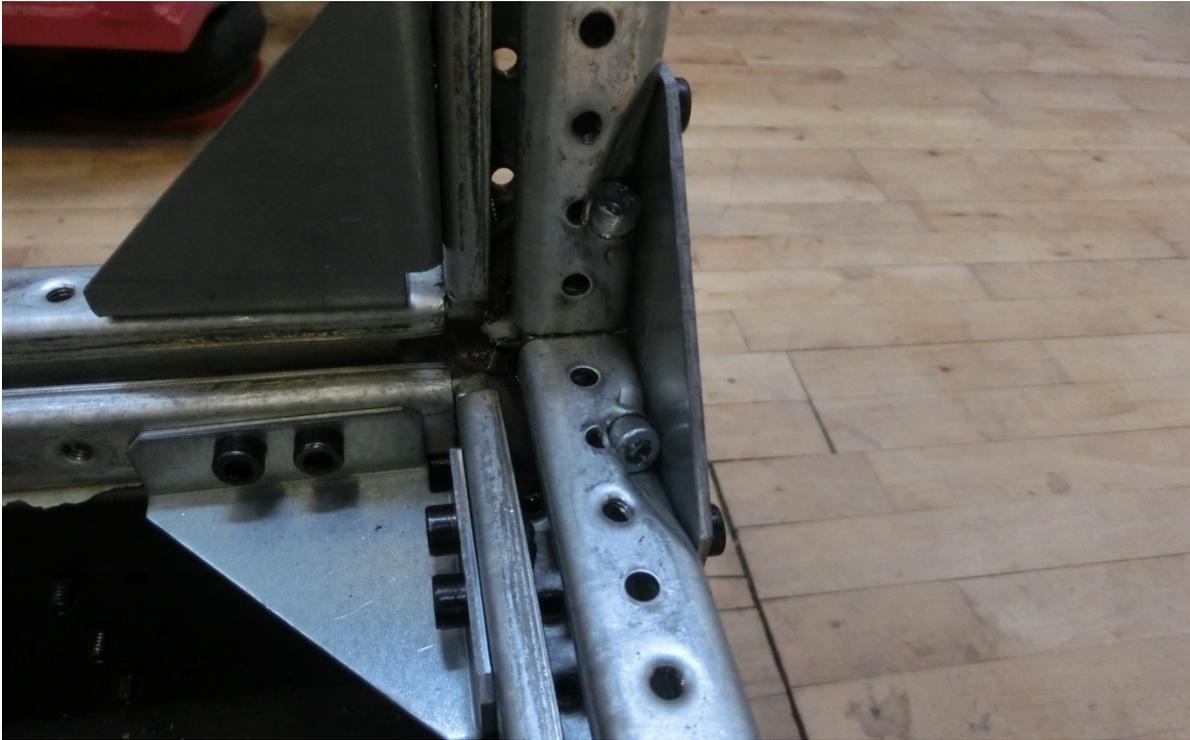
Visual Inspection: "Earthquake brackets" OK.
